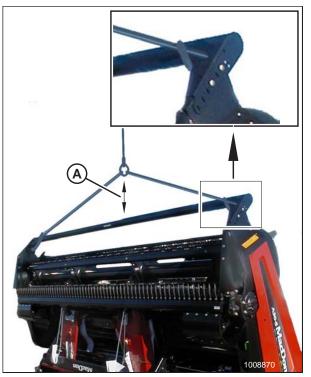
Header with Crane A - 1.2 m (48 in.) Minimum
